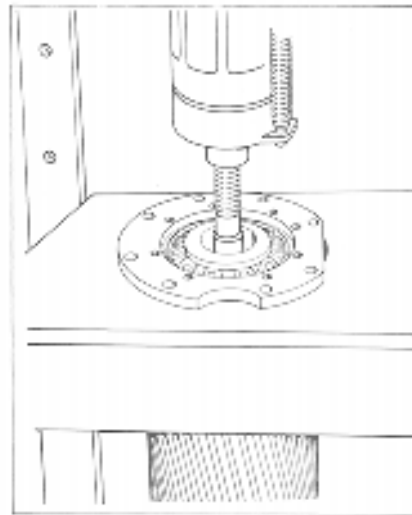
Extracting Pinion Shaft from Bearing Container.
